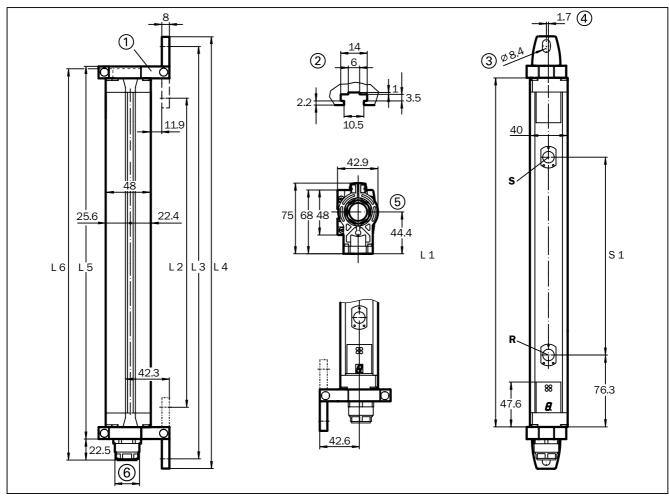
Dimensional drawings and mechanical detail, M 2000-A/P, swivel mount
